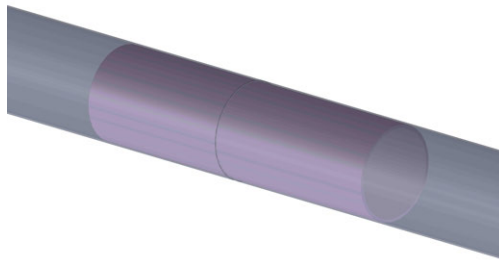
Inner Tube Extension connection in pink, tail boom show transparent
